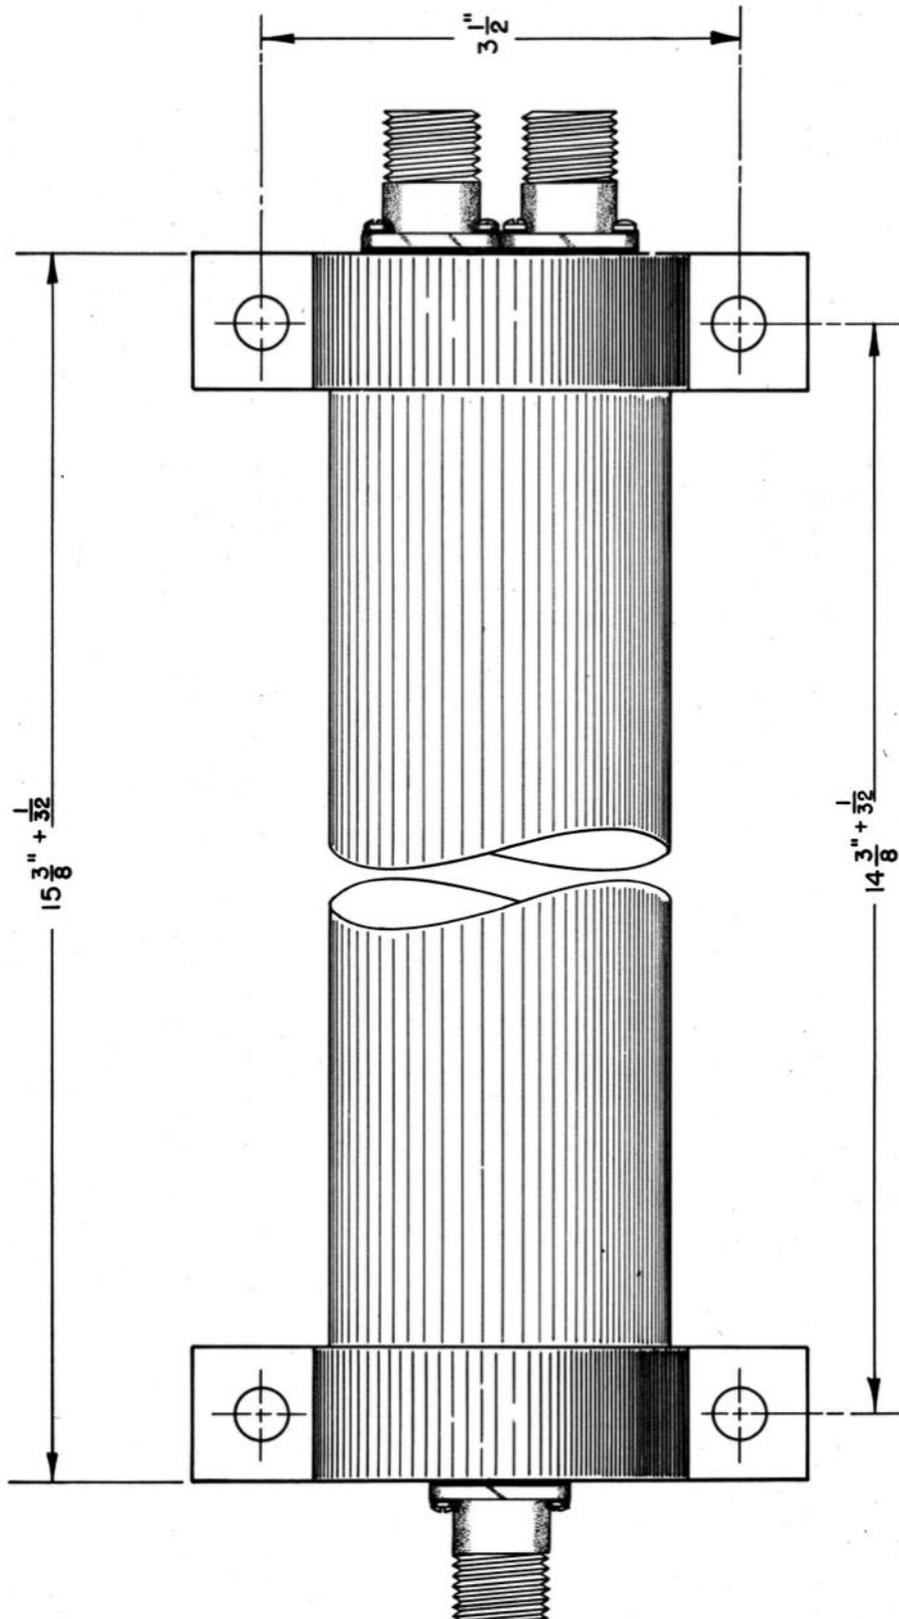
Impedance Matching Transformer CU-27/SPR-1, Outline Dimensional.
